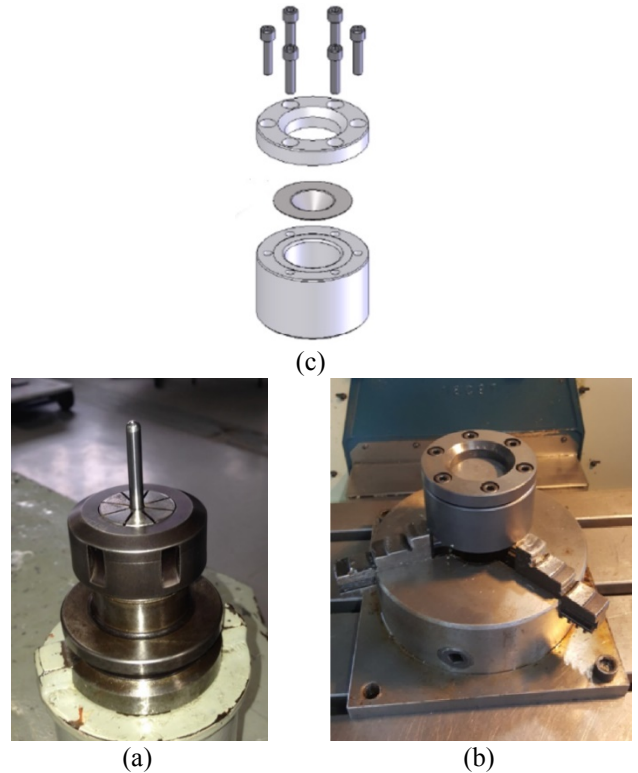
(a) Punch; (b) Device; (c) Exploded vision.
